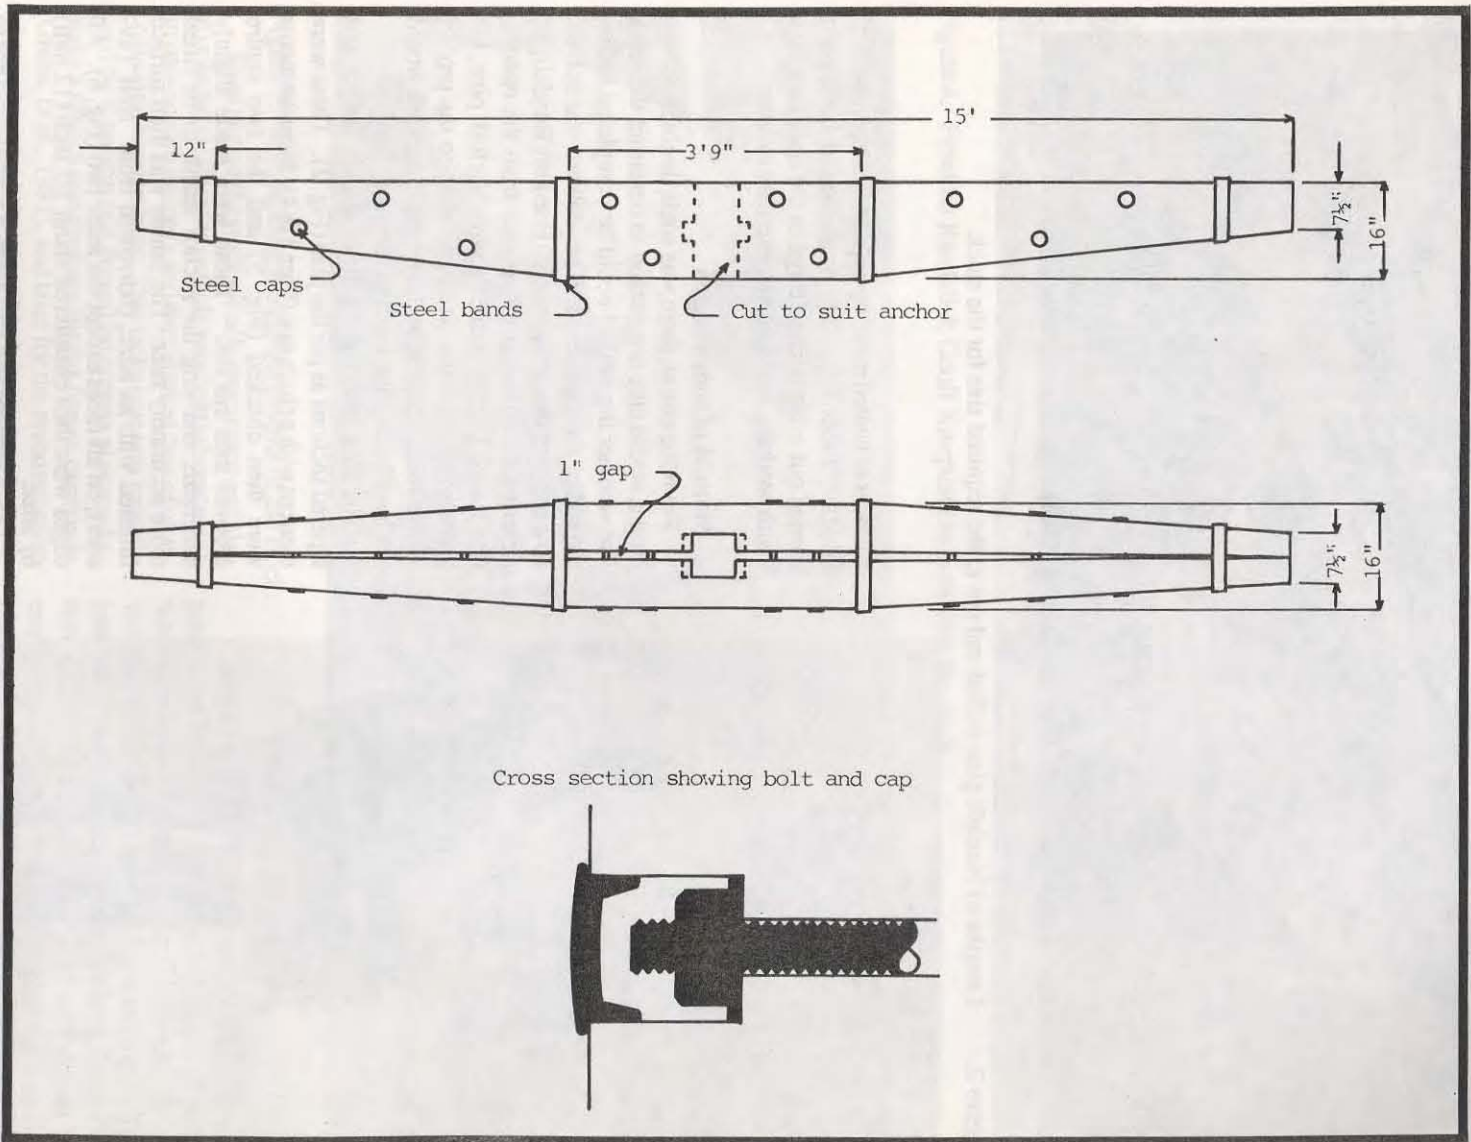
Plan of anchor stock for the HMS *Sirius* anchor (NI 20).
